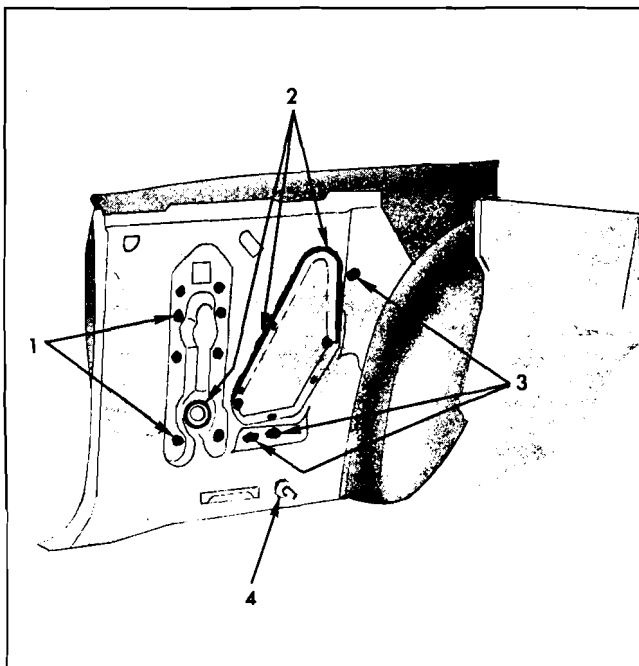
Rear Quarter Typical Inner Panel Sealing - "67" Styles
